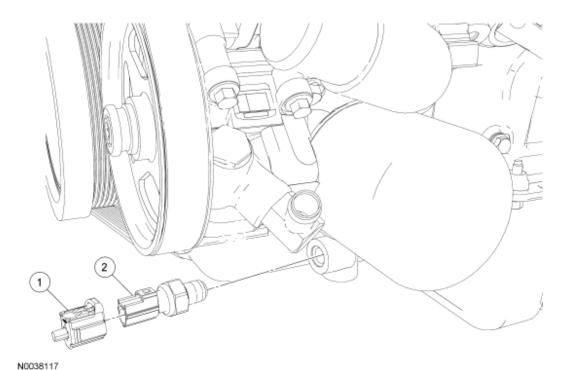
Exploded View Of Engine Oil Pressure (EOP) Switch
